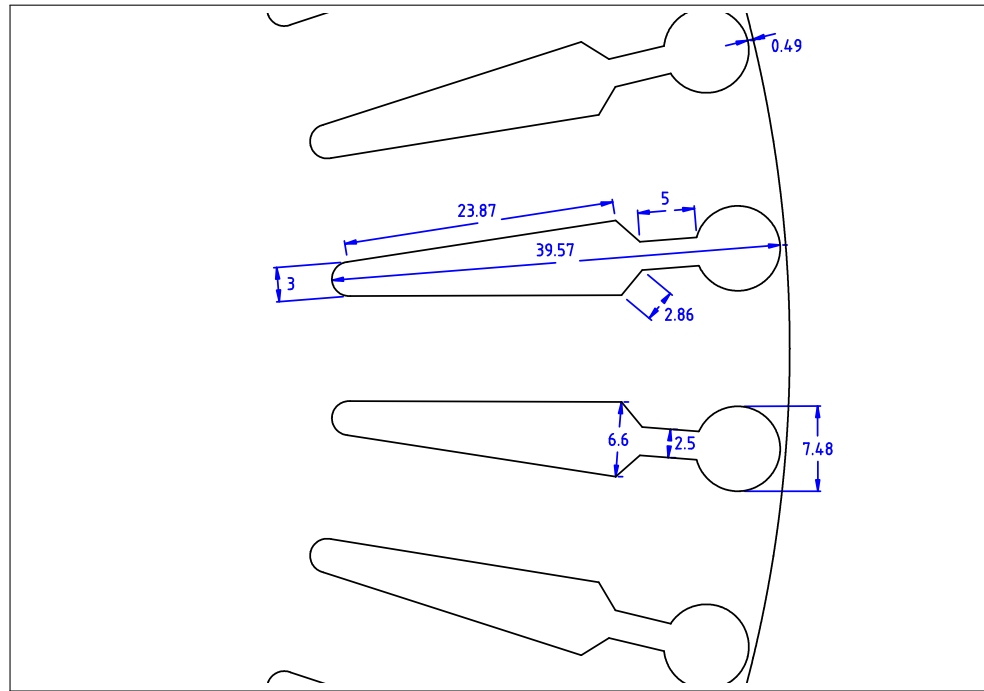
Rotor slot dimensions of the 55 kW industrial induction motor
